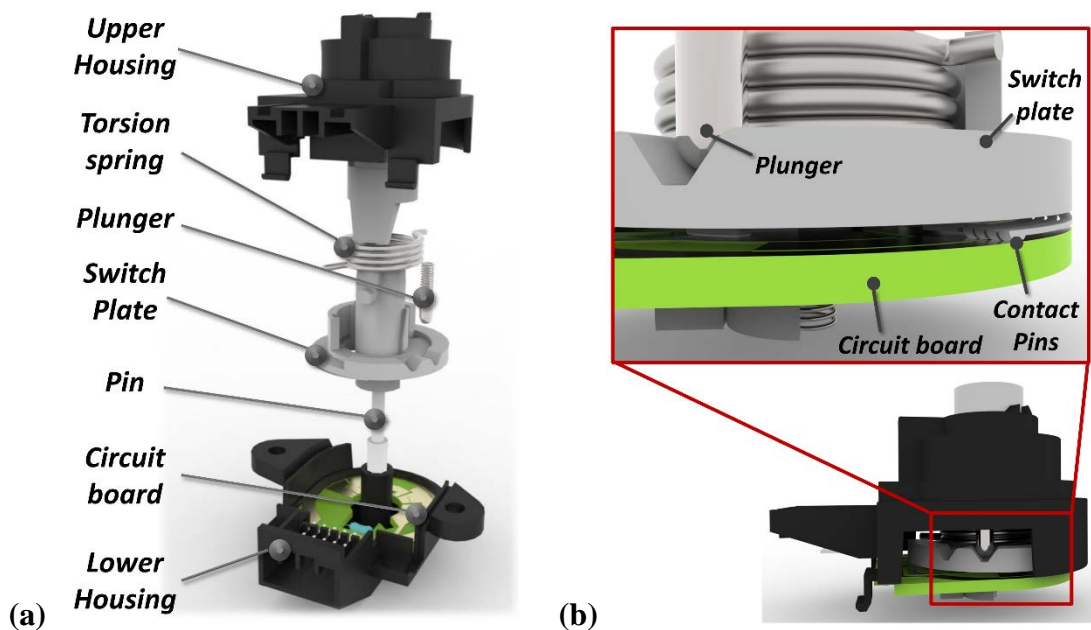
Detailed view on (a) the structure of the ignition switch as exploded CAD view and (b) the function-relevant interface.
